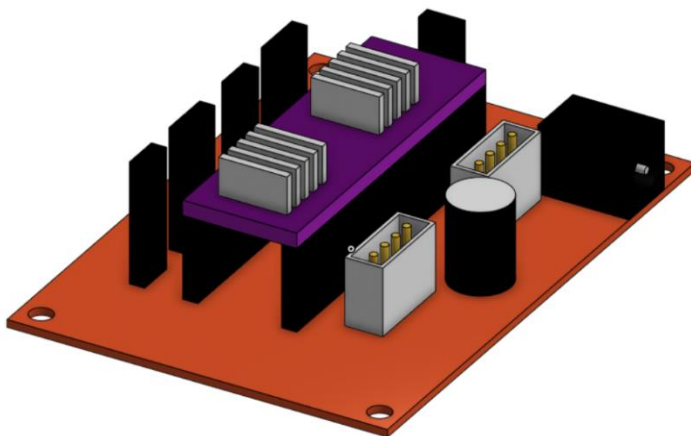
CAD Model Of Stepper Driver Circuit Board (DRV8825 \times 2)
